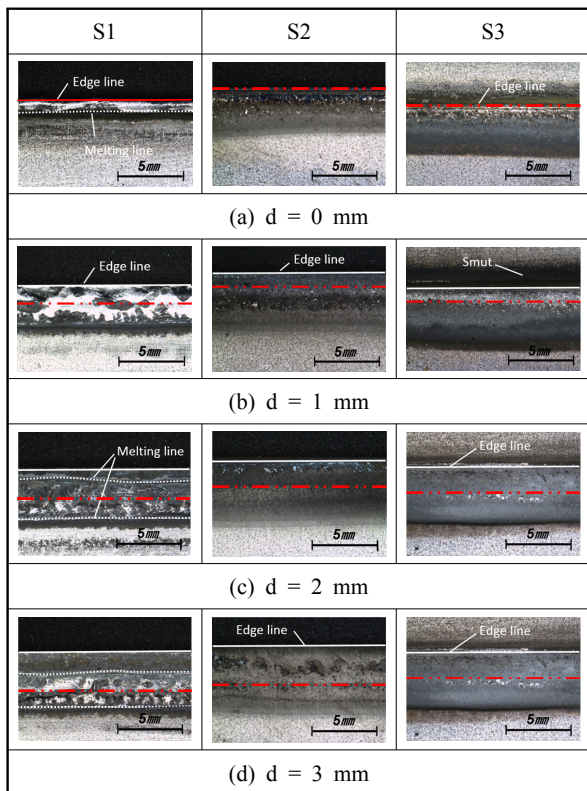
GTA pretreated bead appearance in variable electrode positions (130 A welding current; 1 m/min welding speed)
